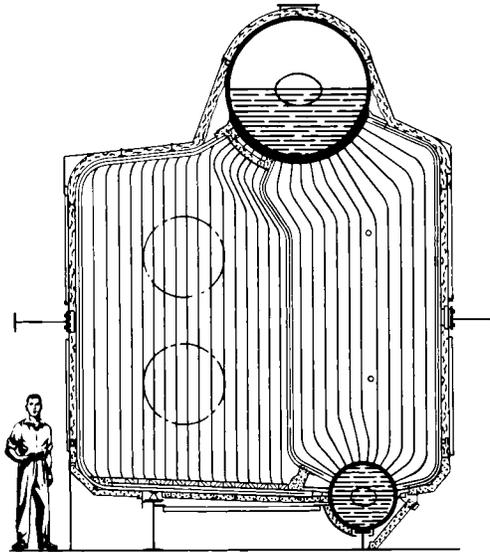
Water-tube package boiler, single-pass gas.
